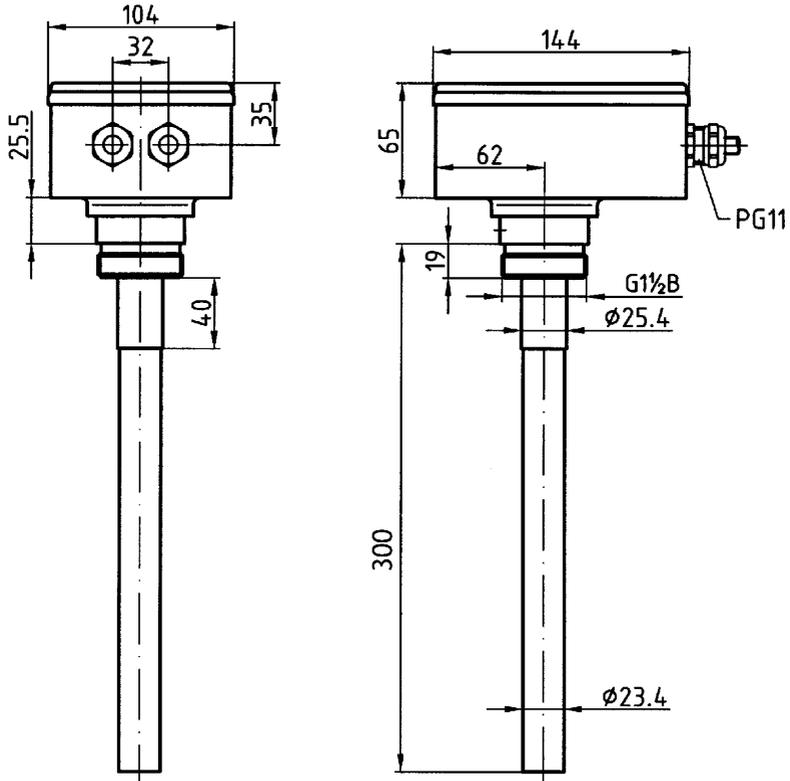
ENT 7 with rod probe, PP partially insulated (dimensions in mm)
